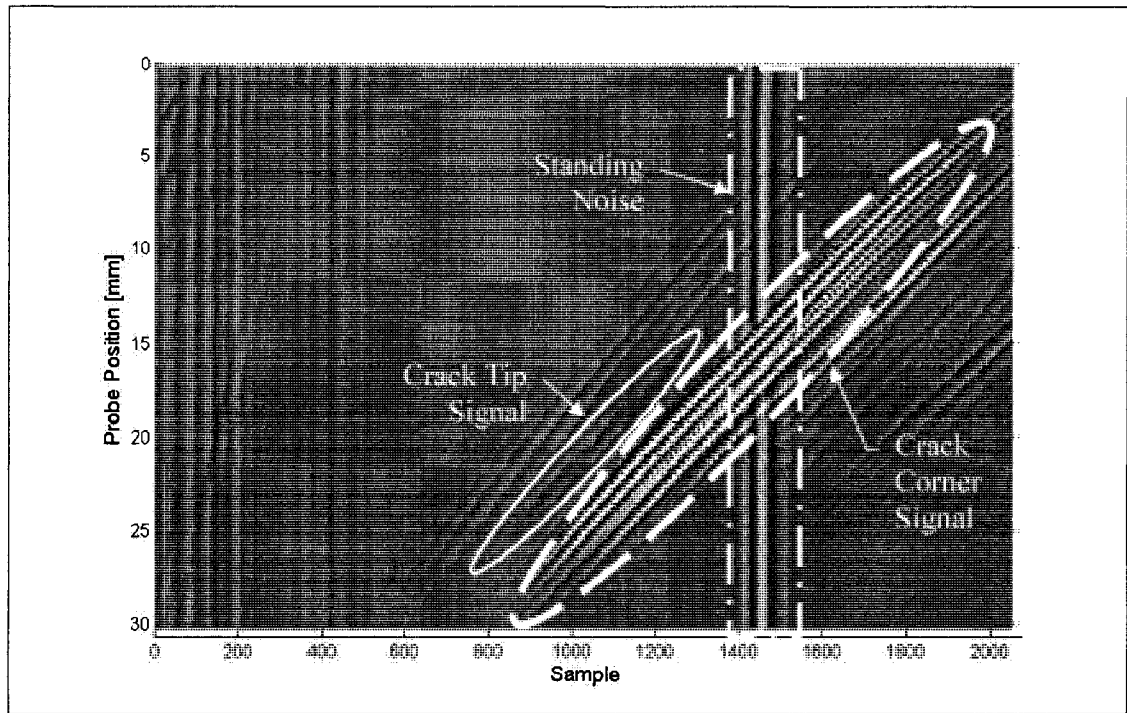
B-scans of specimen CO1 at 50% crack opening load
